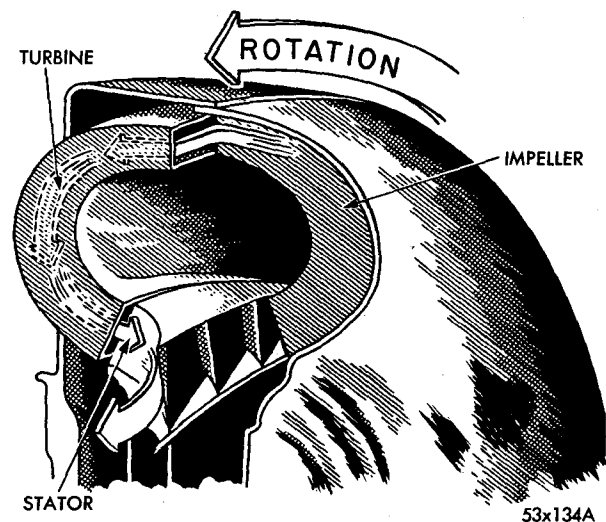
Giving Oil Flow Initial Forward Motion By Inserting Stator with Curved Blades Between Turbine Outlet and Impeller Inlet
